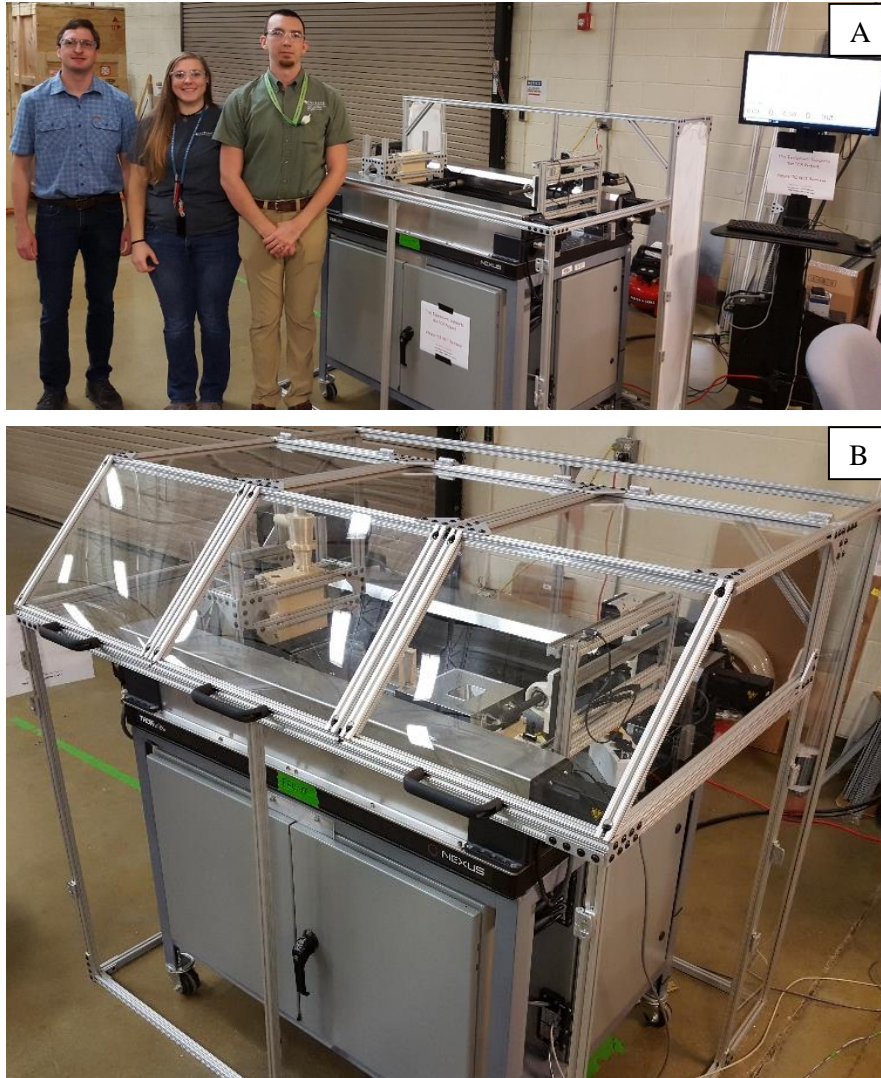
Design team (from left to right: William Carter, Kristin Zaloudek, and Chris Shafer) next to the BJAM³ printer with machine and control enclosures next to the computer that will eventually have a singular user interface for process control (A) and machine enclosure with operator doors installed (B).
